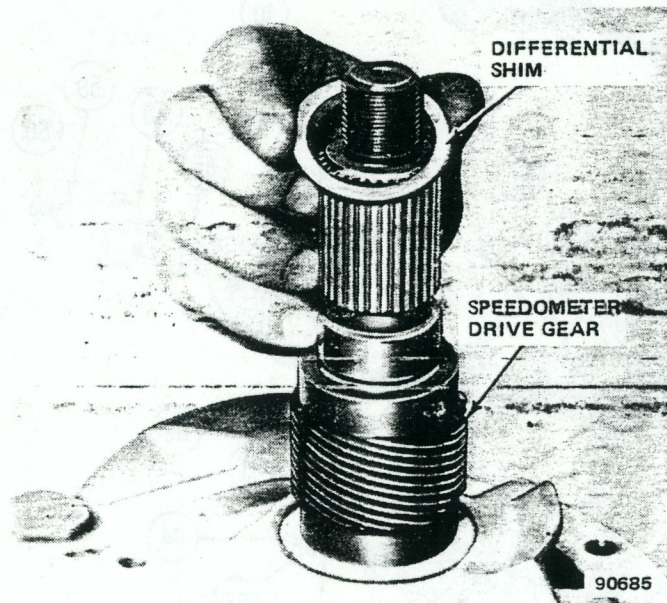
D-45 Differential Shim, Speedometer Gear and Oil Pump
